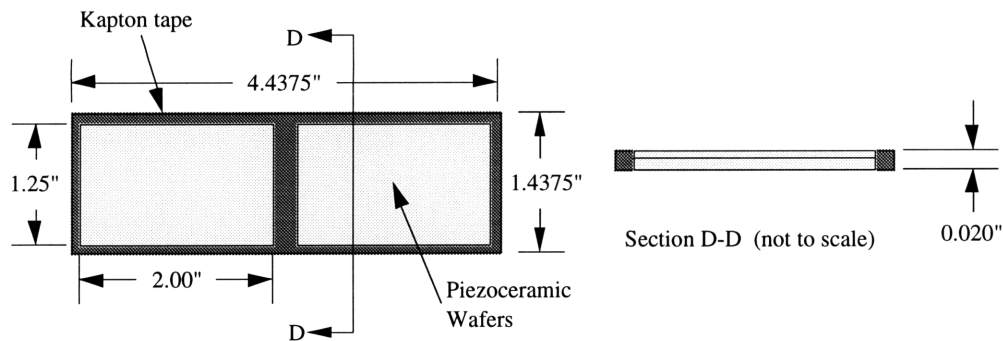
Top view and cross-section detail of one piezoceramic actuator package
